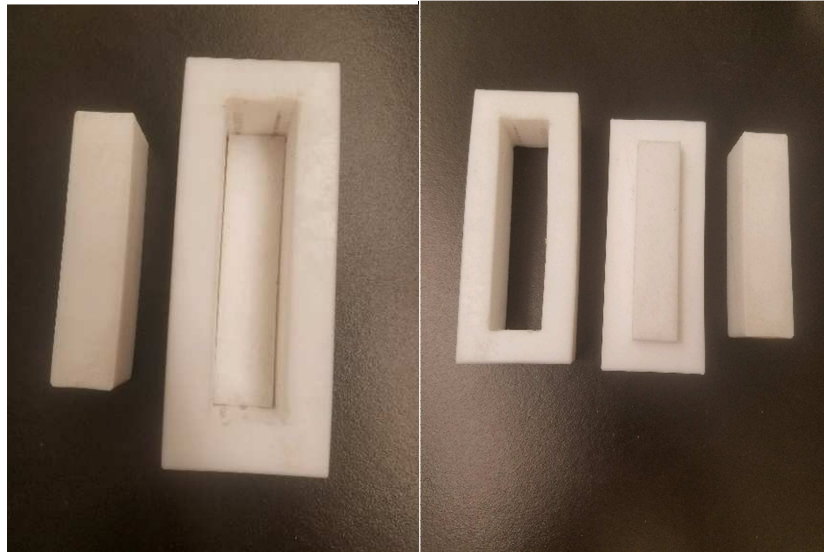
Teflon brick mold used for the microwave trials (partly assembled, left; not assembled, right).
